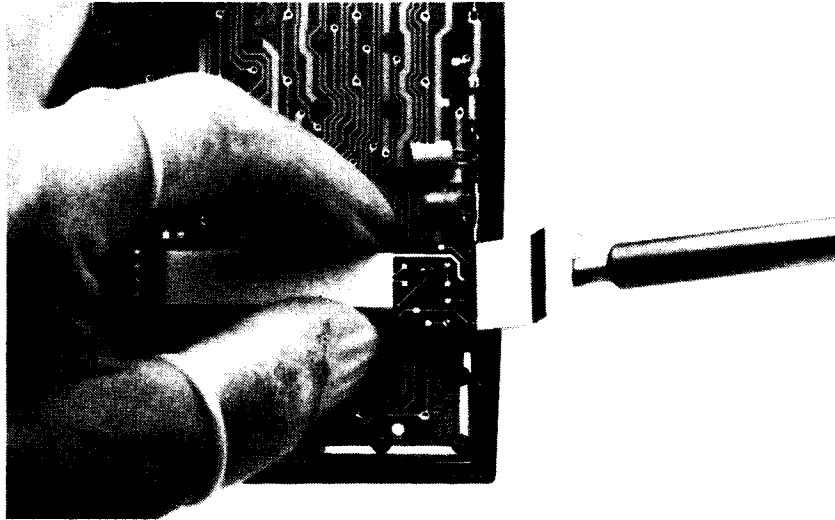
Blade-Shaped Soldering Iron Tip in Use
